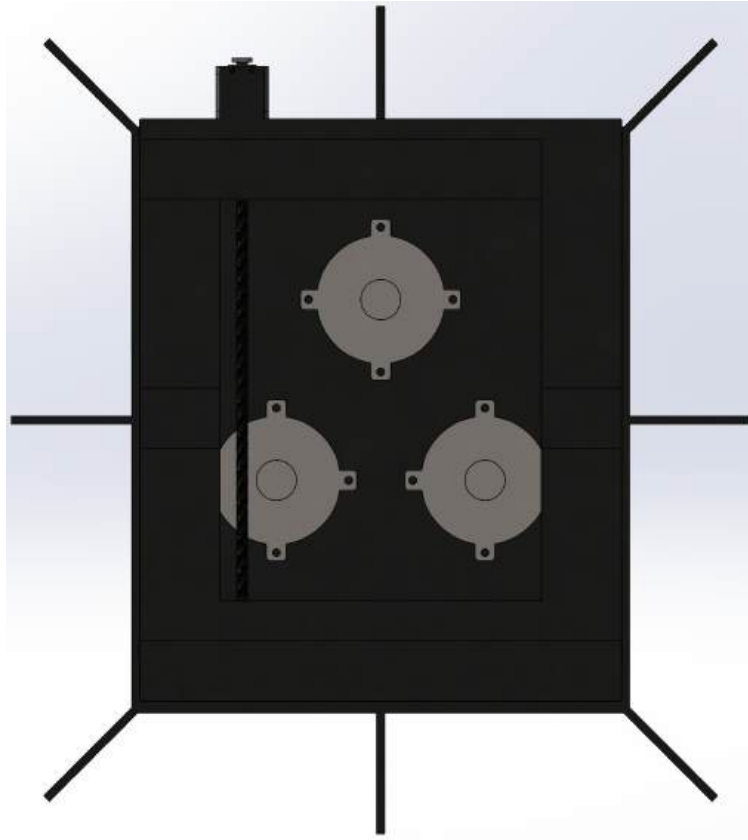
Scuttle MK2: View of ASRG from mount plate detailing linear actuator rod path and male HDMR pins.
